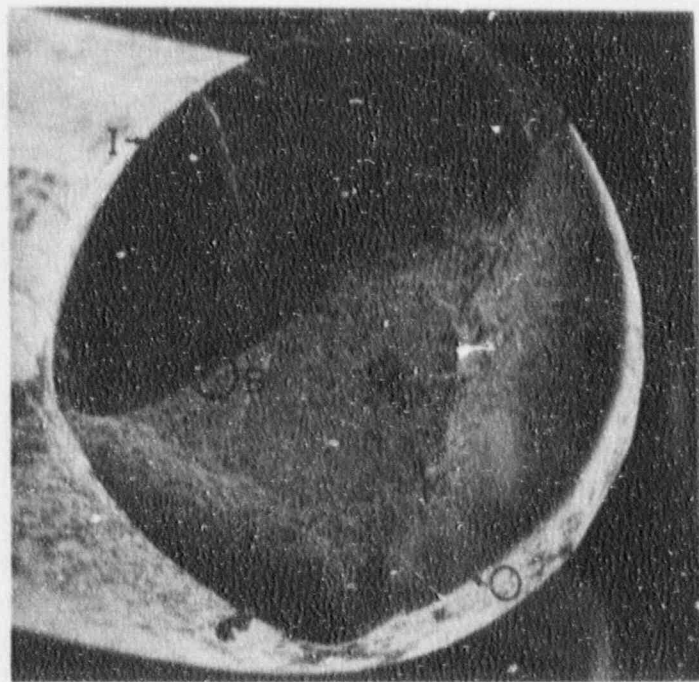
SEM micrograph of the fracture surface of the indicator spring. Mag: 100x.
